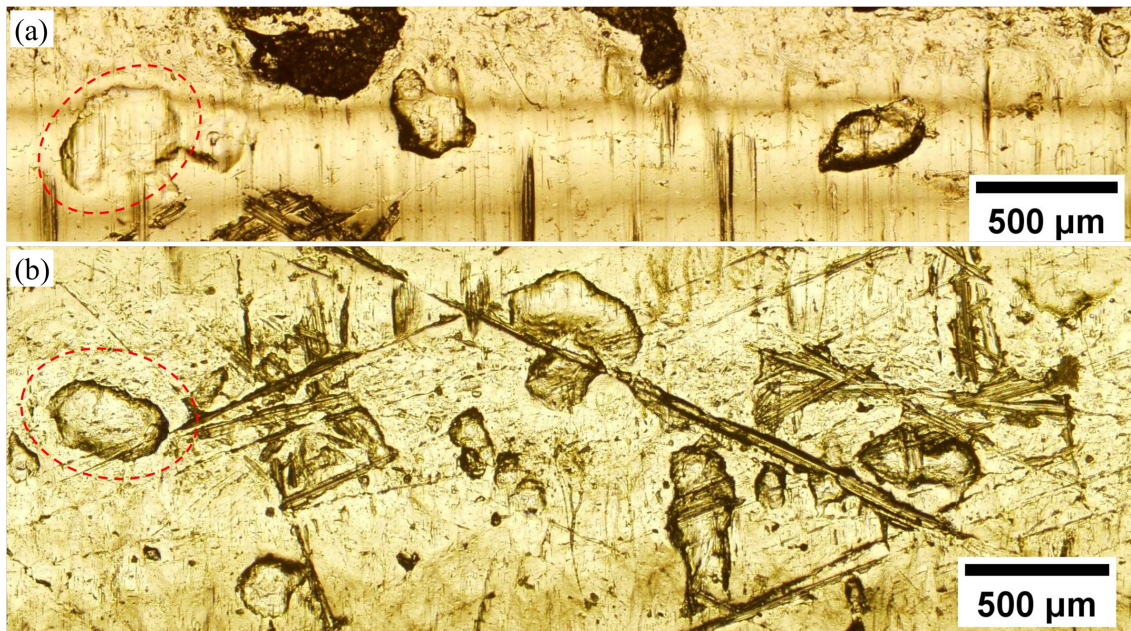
Dents on the tooth surfaces that have similar sizes and shapes to macropits; examples are highlighted with red dashed circles; (a) the tooth surface of the driving gear at 2.3 million cycles; (b) the tooth surface of the driven gear at 0.94 million cycles.
